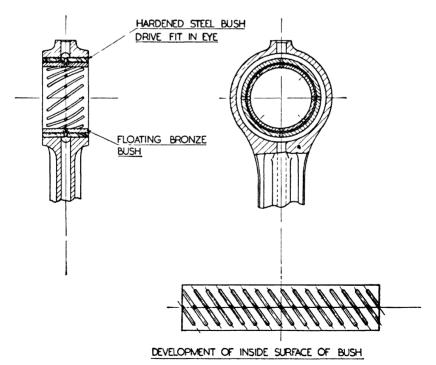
Gudgeon-pin bearing with floating bush for 2-cycle engine
